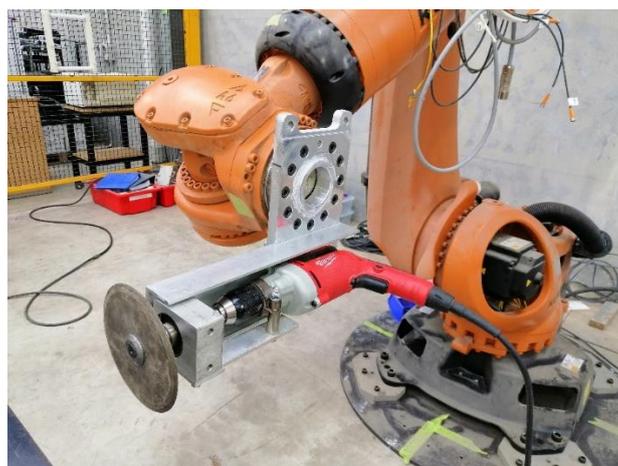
Robot spindle setup to test different blades. A robot was used for both safety and to produce a straight line
